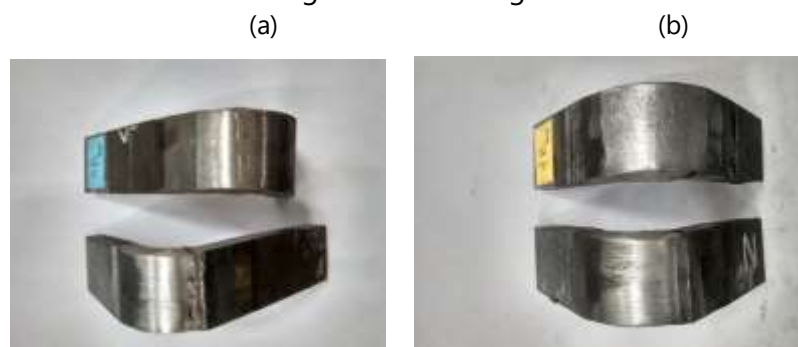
(a) Specimen with three layers weldment, (b) Specimen with four layers weldment
